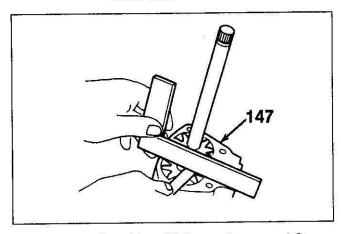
Checking Oil Pump Cover and Gear End Clearance
